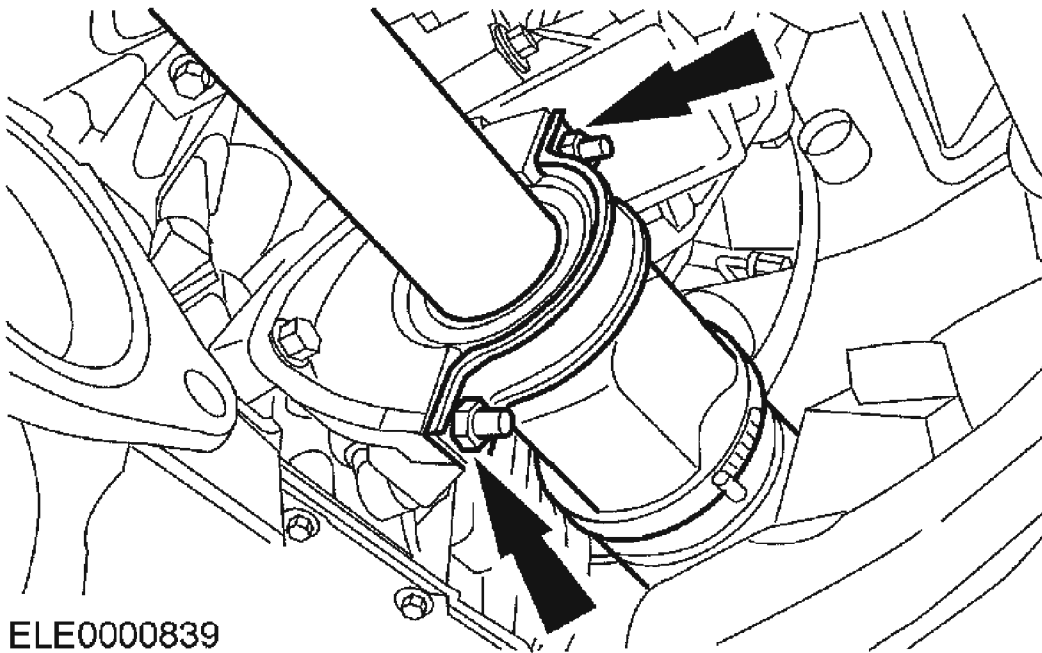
Removing Nuts And Intermediate Shaft Bearing Bracket
